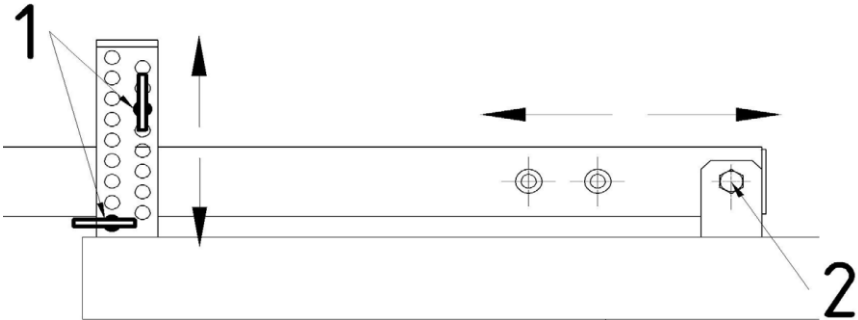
Depth and shaft distance adjustment: 1 – bolts for adjusting the working depth with a stabiliser plate; 2 – screw for fixing the shaft arms.
